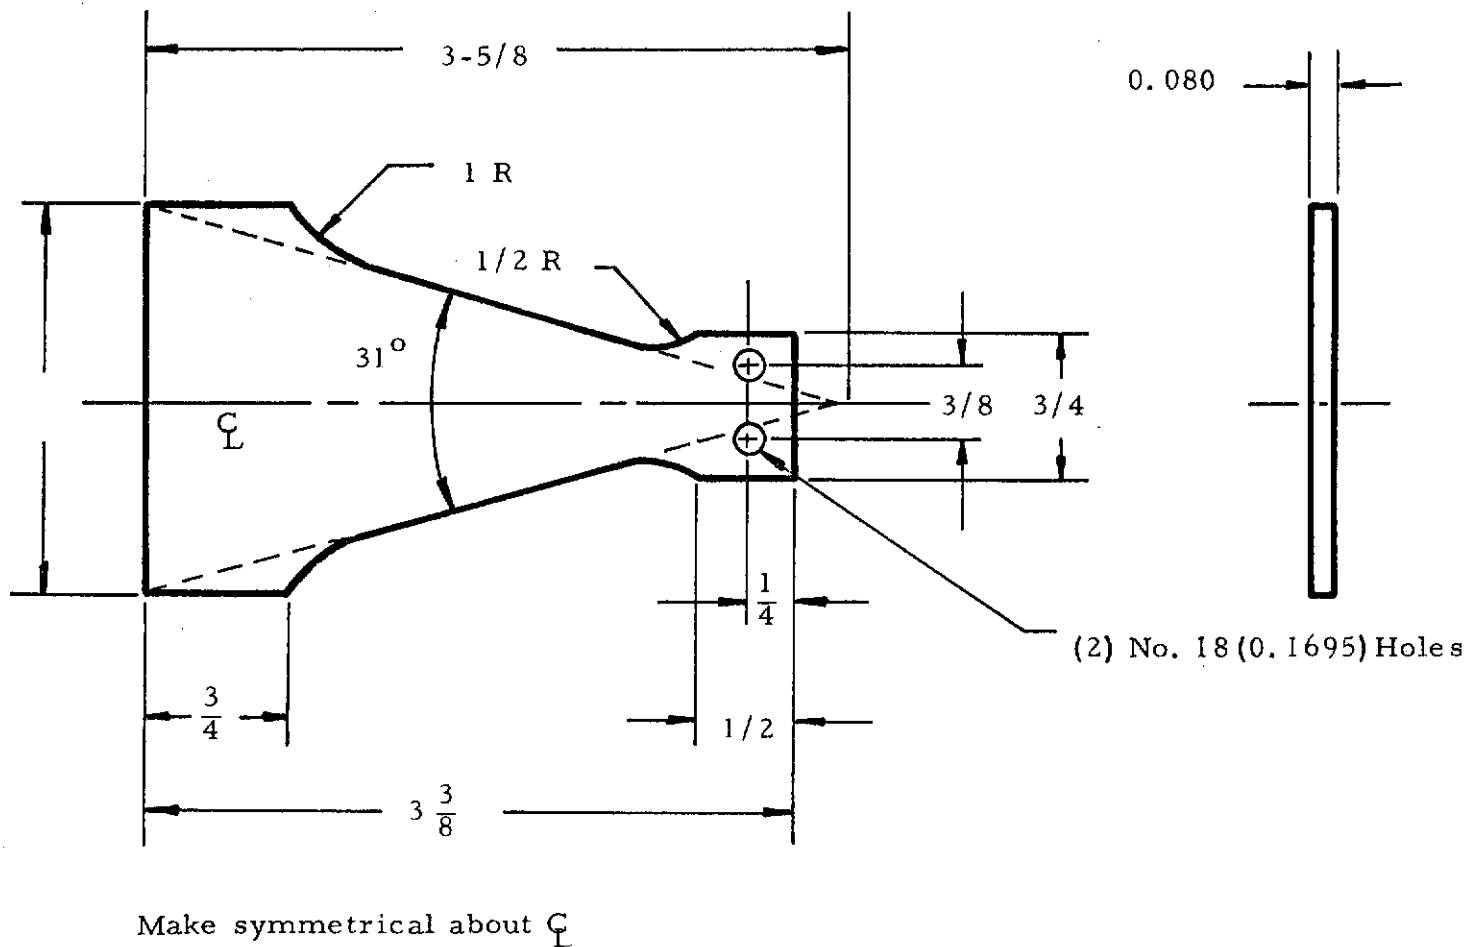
FATIGUE SPECIMEN (All dimensions are in inches)
